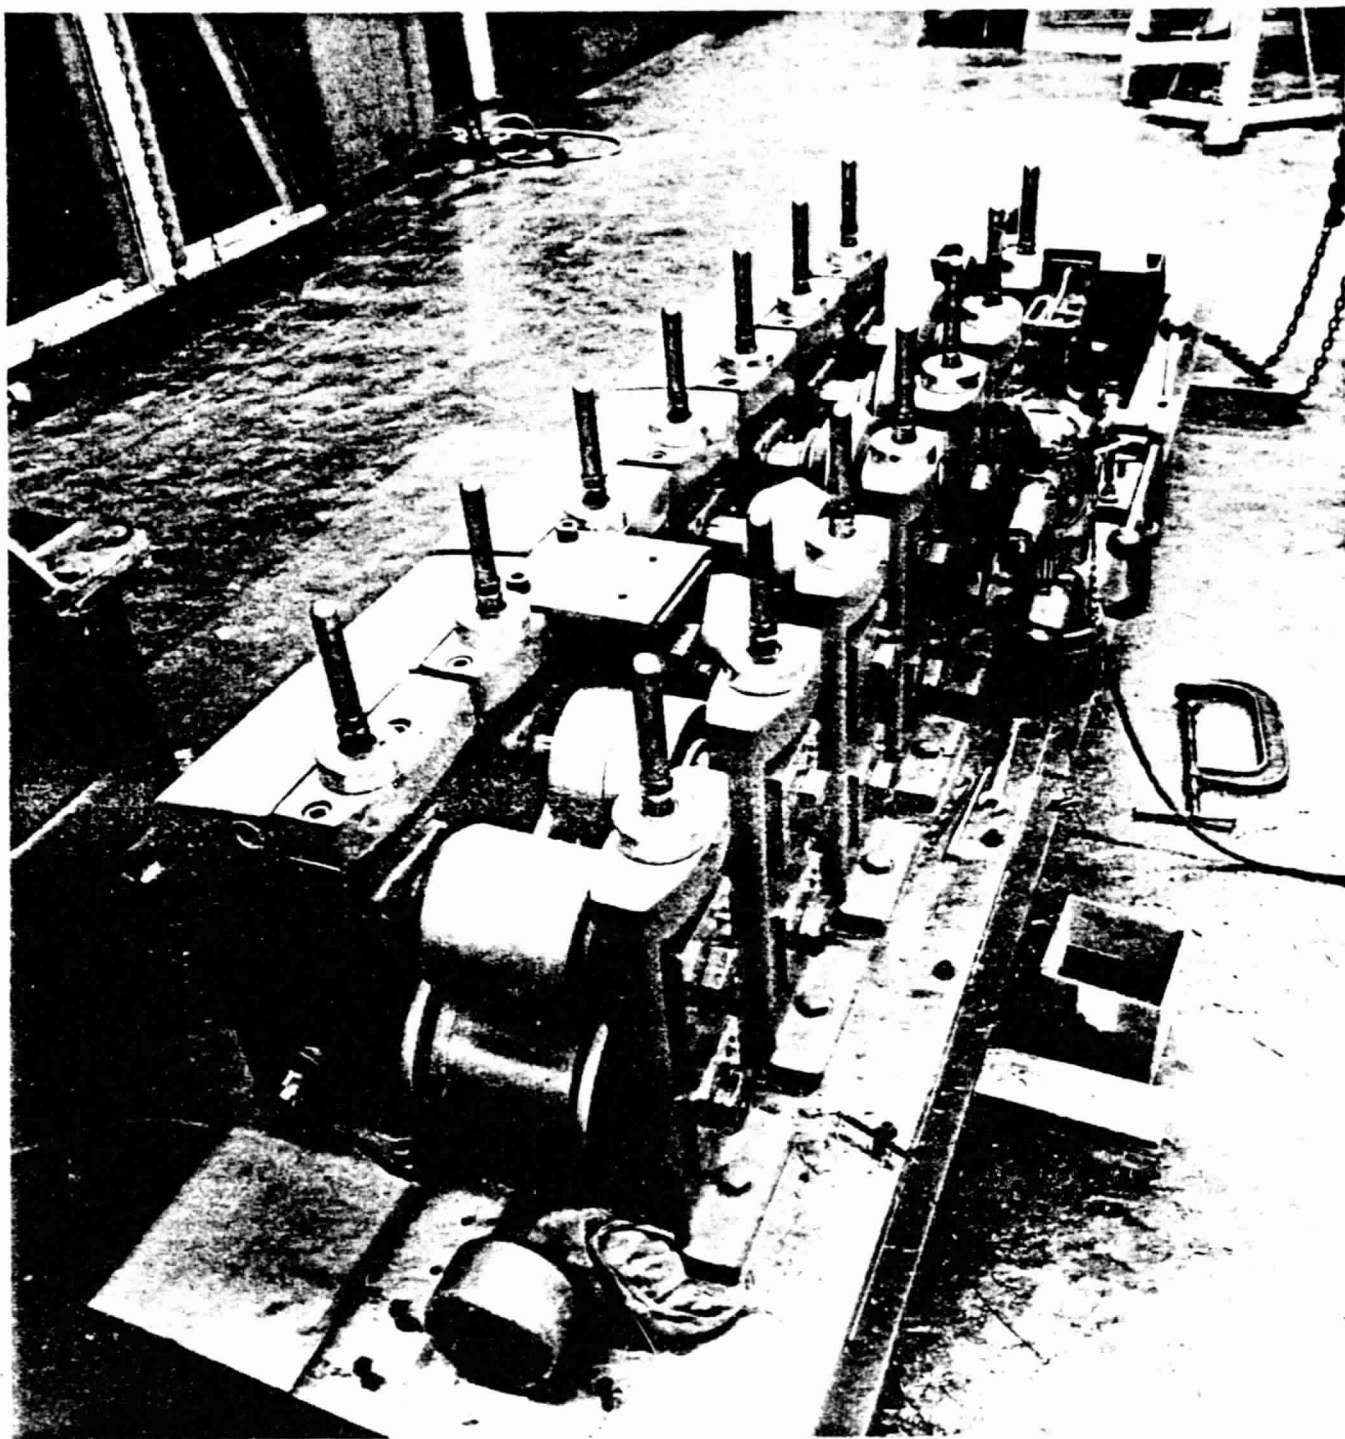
Yoder Mill No. 3 Mounted On Box Beam
